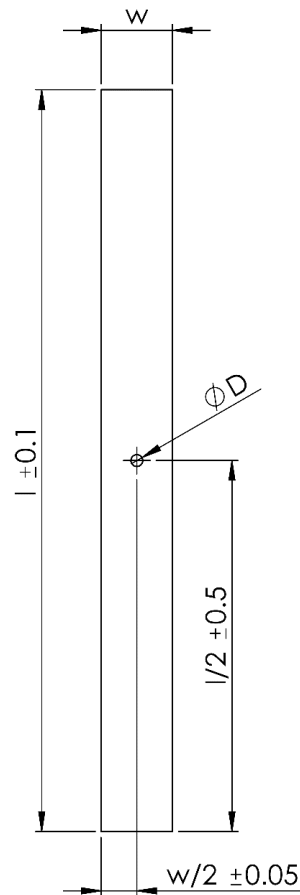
Drawing of a representative specimen. Refer to Table 1 for the numerical values of the dimensions for the various specimen types.
